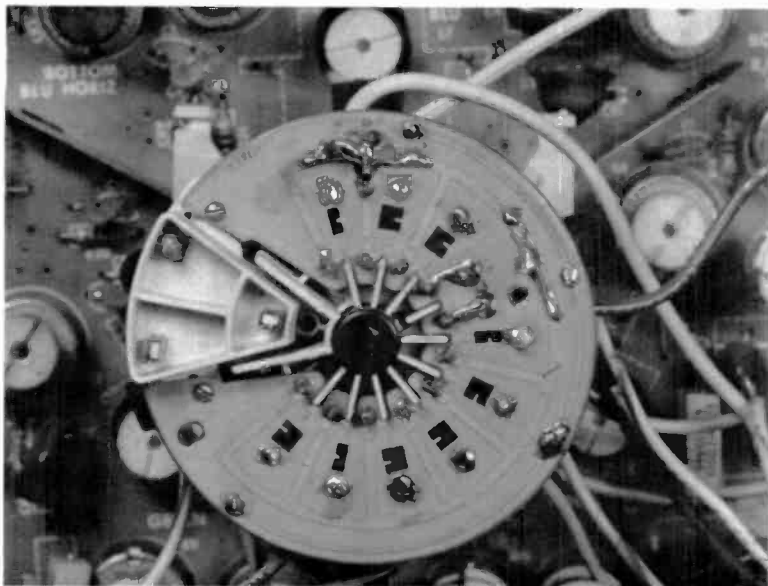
TV kinescope-socket board using porcelain-coated steel.
